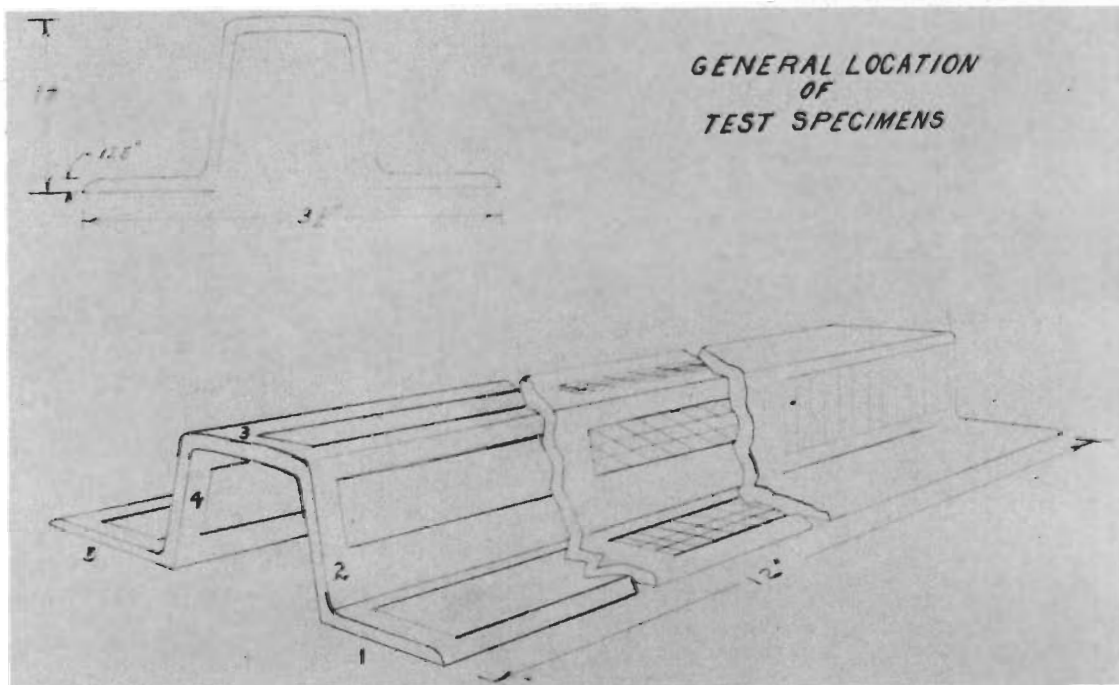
B XA78S-T6 HAT SHAPED EXTRUSION DESIGN NO. 11976
